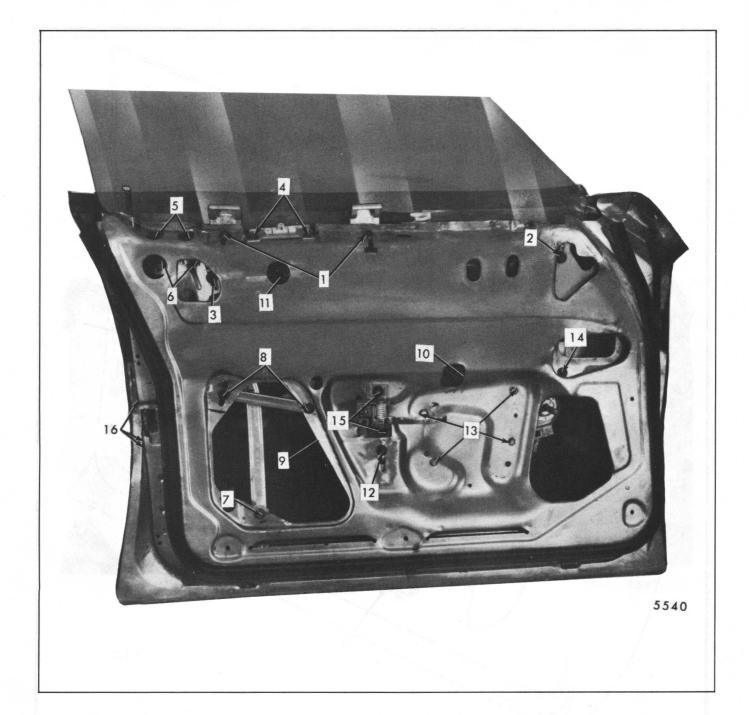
Front Door Hardware Attachments - "A-29, 35" Styles
